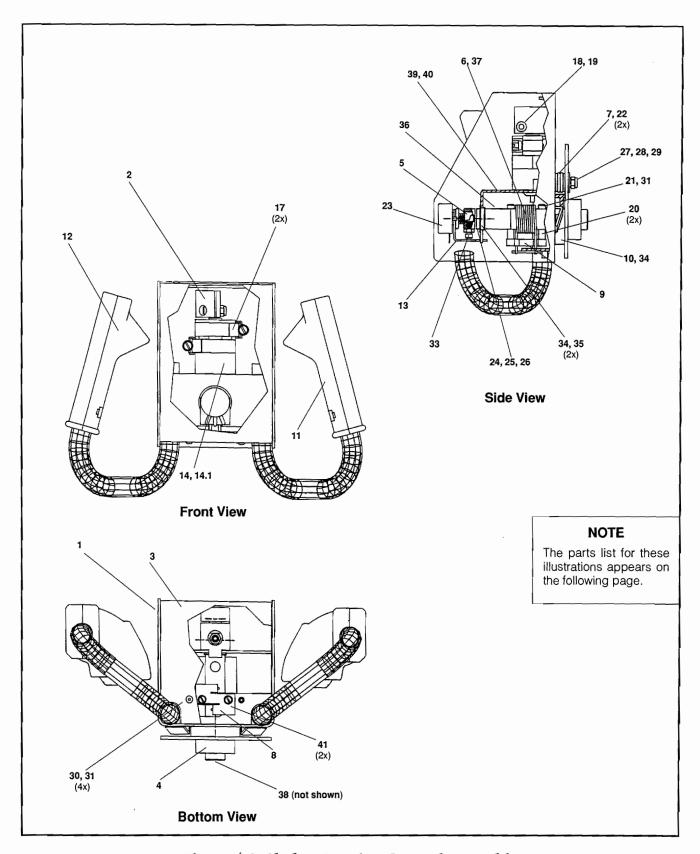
Shaker Steering Control Assembly A049454-01 C
